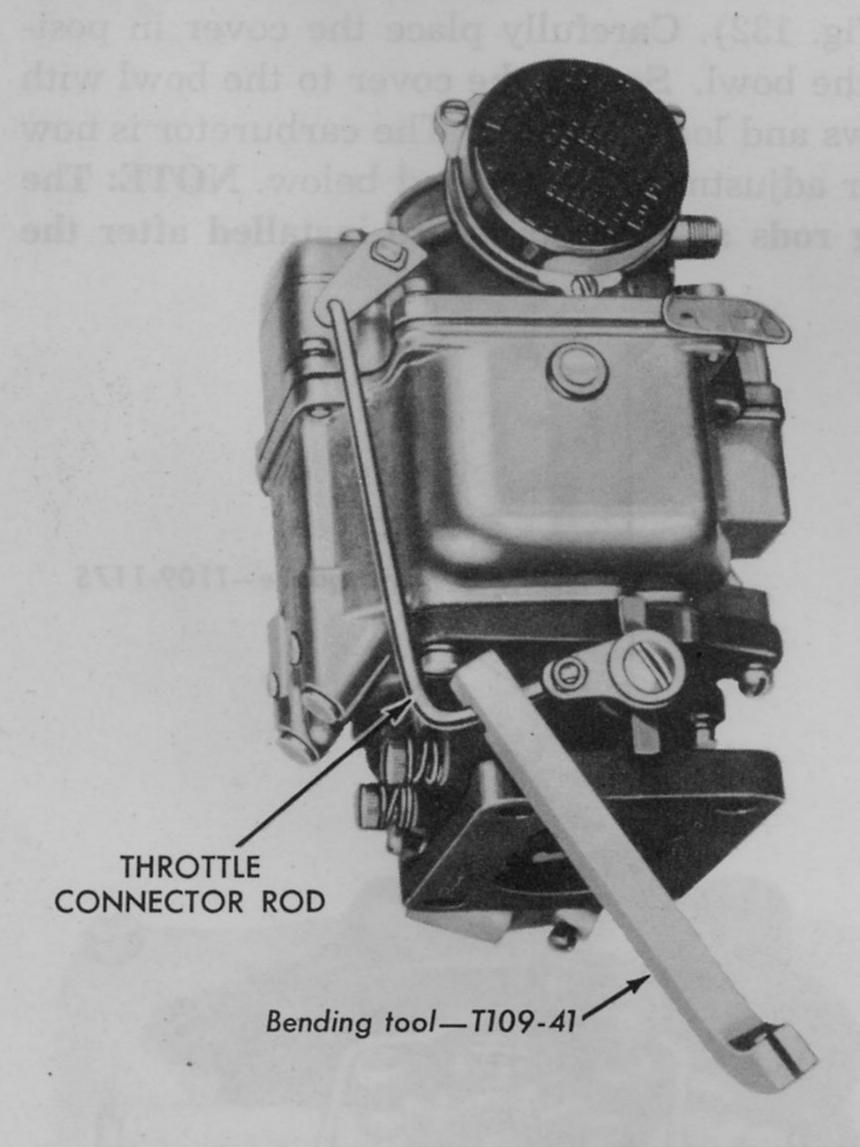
Adjusting Accelerating Pump Travel (WCD-723S)
